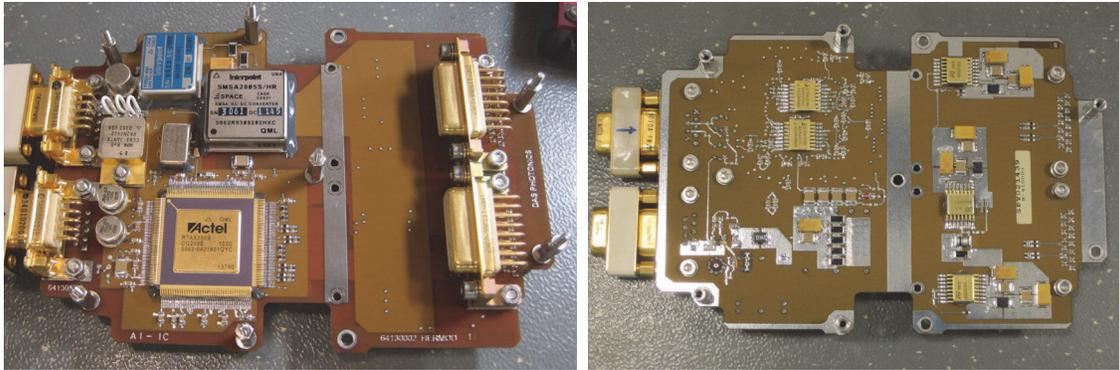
Front and back view of the HERMOD PFM PCB just after the components being mounted.
